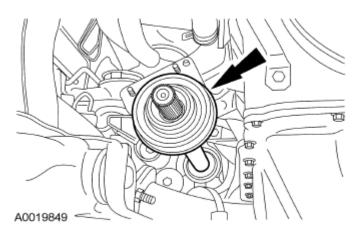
Locating Intermediate Shaft Courtesy of FORD MOTOR CO.
